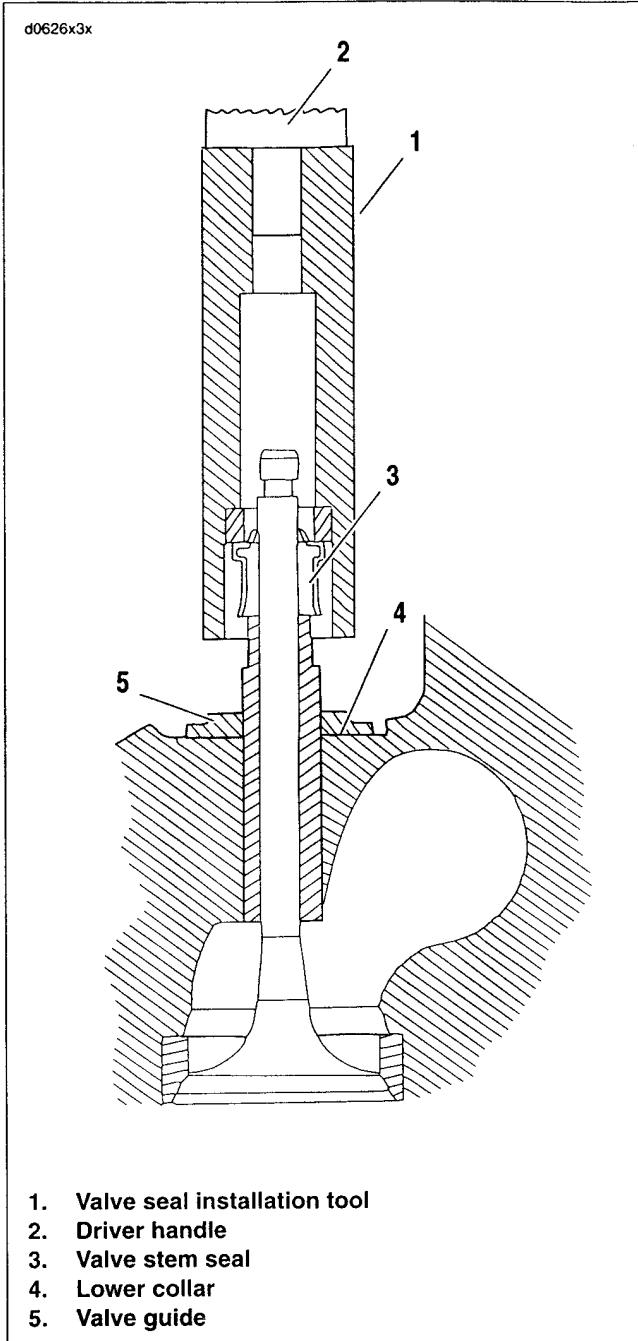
Installing Valve Stem Seal Using Arbor Press
